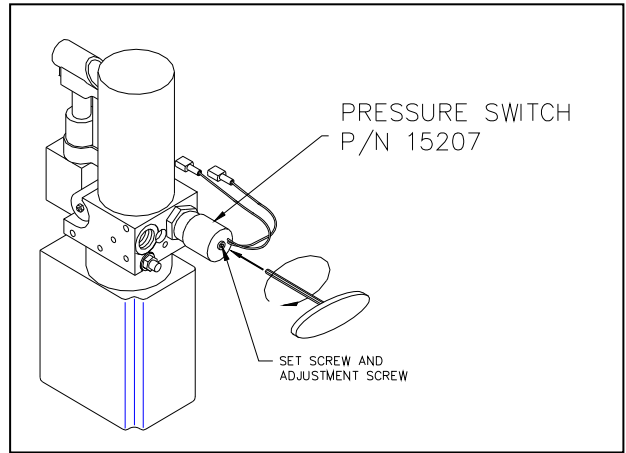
PRESSURE SWITCH TEST AT FLOOR LEVEL
